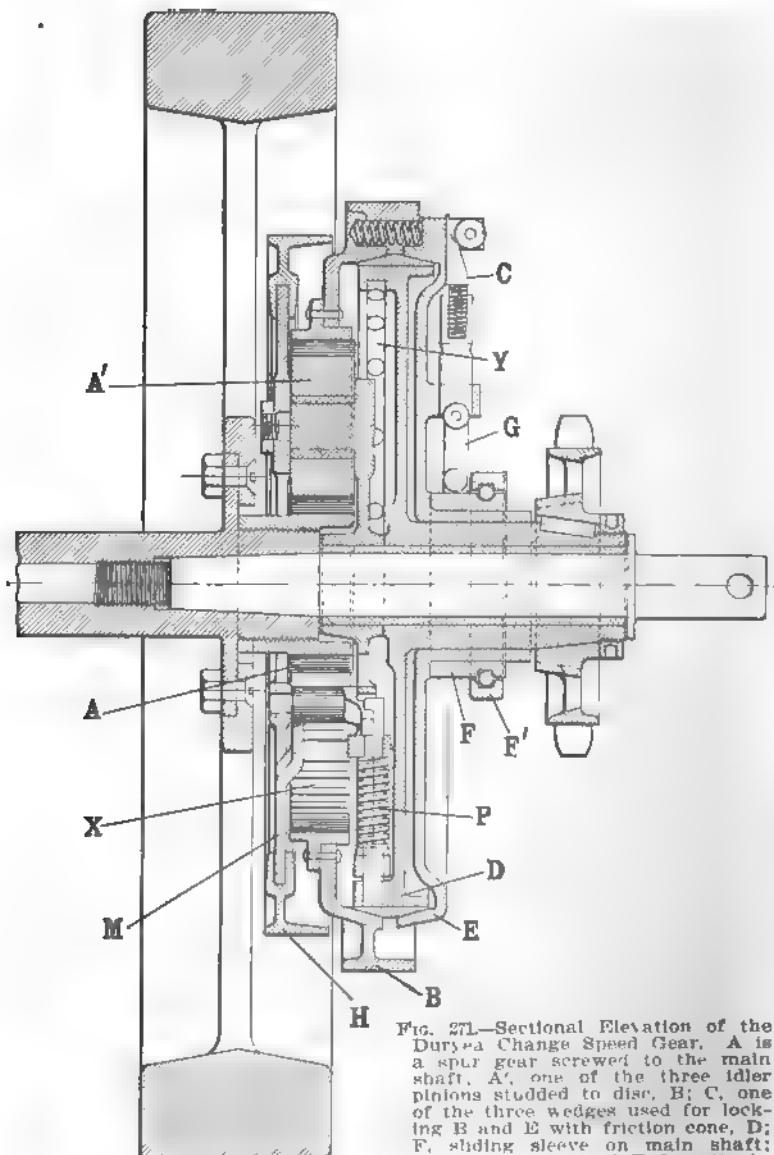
Sectional Elevation of the Duryea Change Speed Gear. A is a spur gear screwed to the main shaft; A', one of the three idler pinions studded to disc, B; C, one of the three wedges used for locking B and E with friction cone, D; E, sliding sleeve on main shaft; F', ball race around F for attaching the shifting lever; G, toggle joint operated by shifting sleeve, F; M, lever for raising or lowering pin, P; X, an internal gear on disc, B; Y, a groove containing perforations for admitting pins, P, when H and B are locked together.
